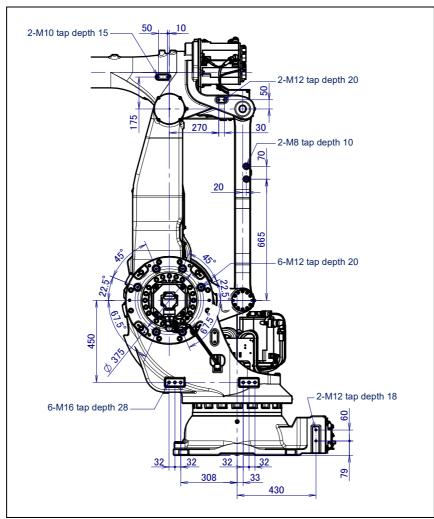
(b) Equipment mounting faces (M-900*i*B/360/360E (2/2))
